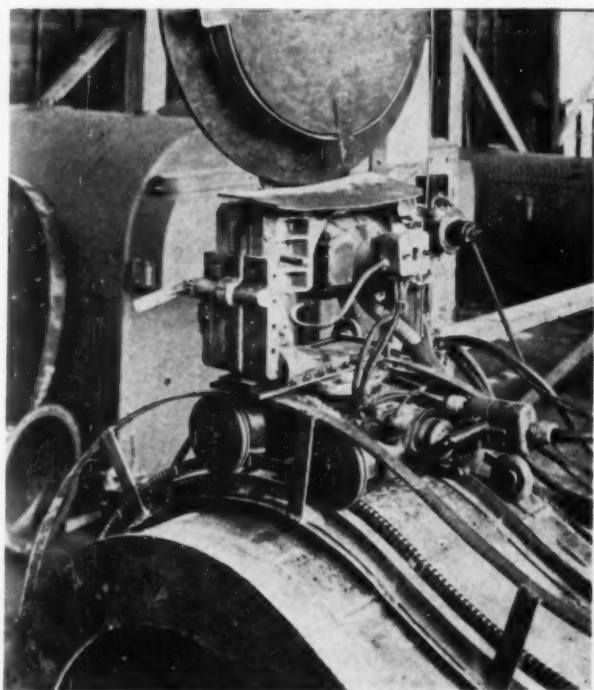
WELDING SETUP USED ON SCOTCH-TYPE MARINE BOILER
